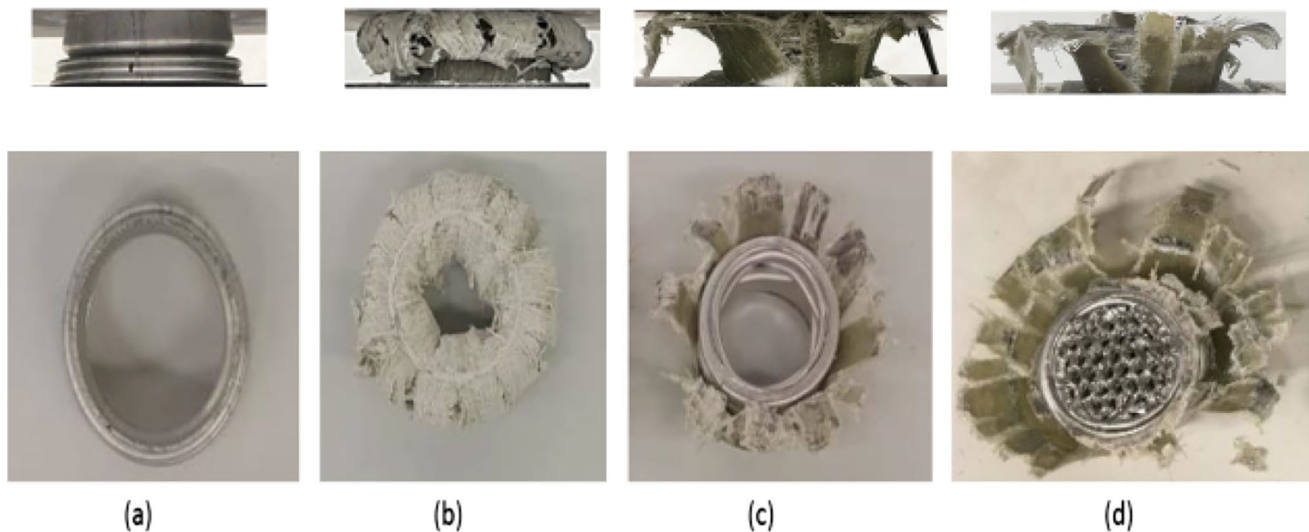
Deformed shape of the specimens corresponding to 60 mm deformation a Aluminum 6082 T6 tube b GFRP tube c hybrid tube d honeycomb filled hybrid tube
